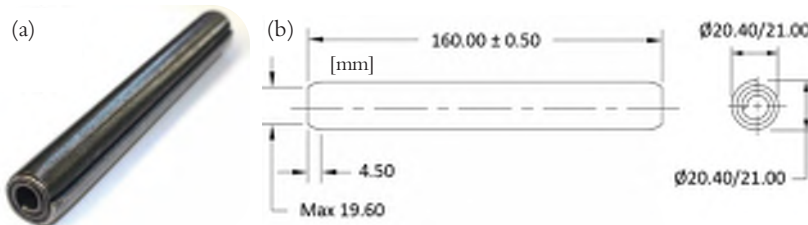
(a) Photo of a CSP, (b) CSP 20x160 dimensions
